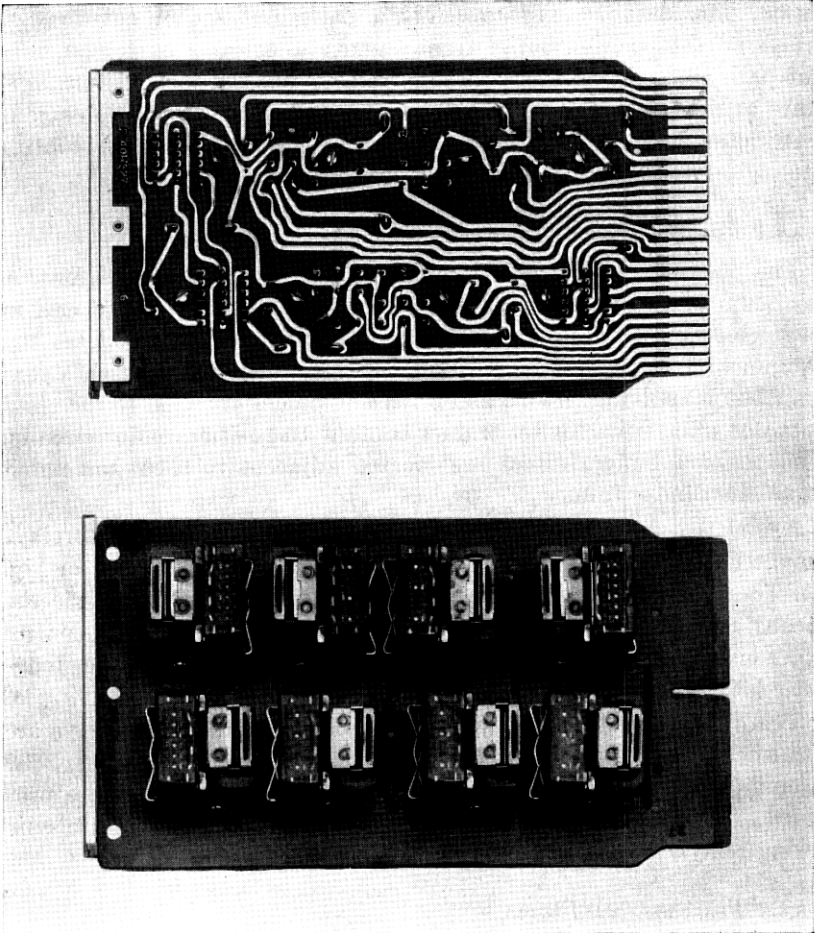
Miniature wire-spring relays mounted on pluggable printed circuit wiring boards.
